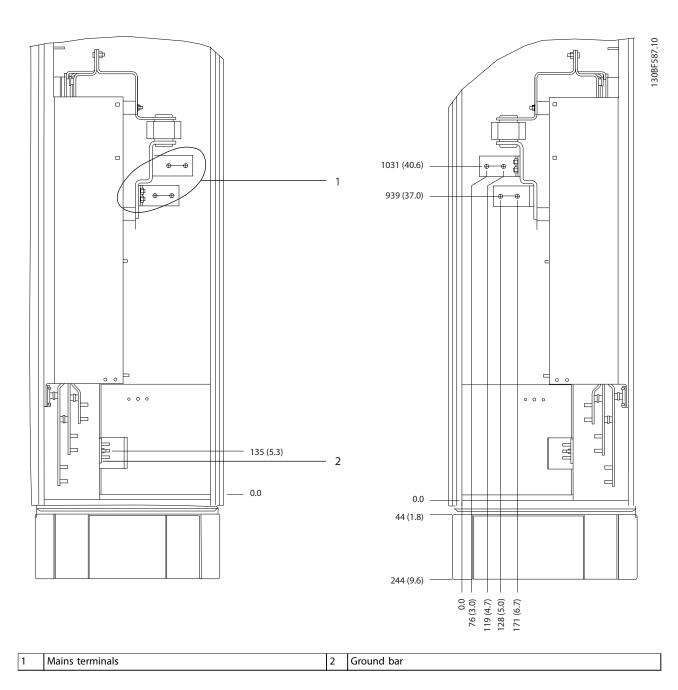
Terminal Dimensions for F9 Options Cabinet, Side View
